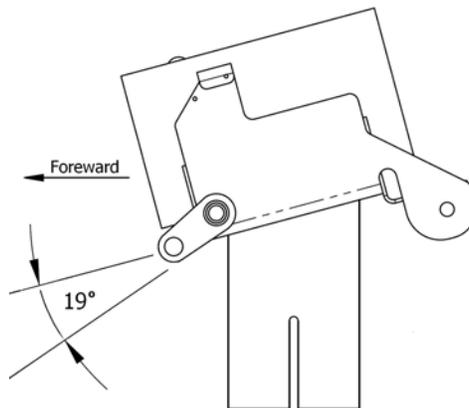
Install The Flapper Arm With The Control Tab Pointing Forward
